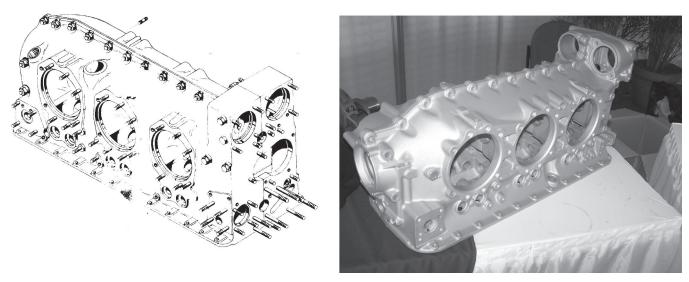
Crankcase machined mounting pads for a six-cylinder opposed engine.
